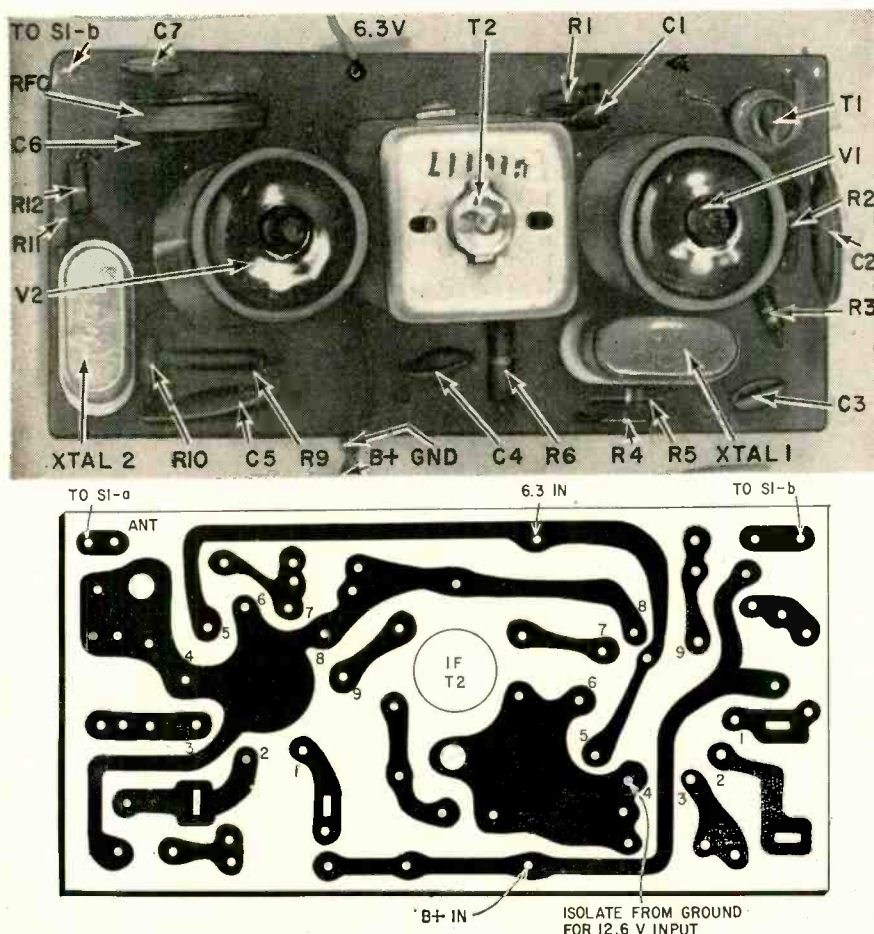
(a) Under side of the converter's 1 1/8 x 3 3/8 inch printed-circuit board. (b)—top view photo shows placement of converter's components.
